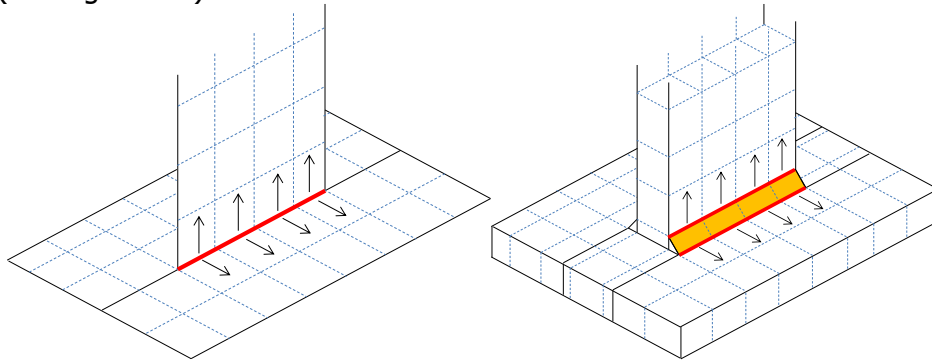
Edge weld (left) and face weld (right)
